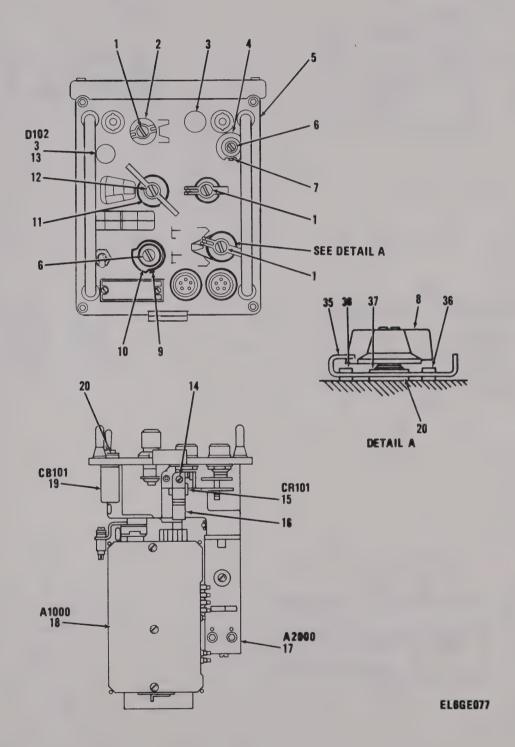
Control Assembly, Front Panel (Sheet 1 of 2).
